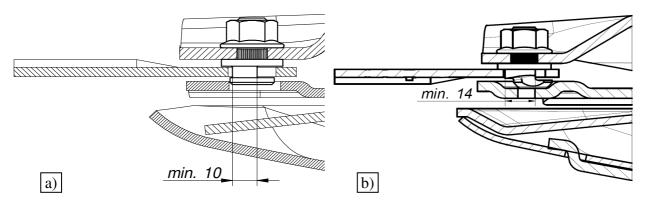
Permissible wear of knife holder pin on disk a) knife base M12 b) knife base M12 with claw
